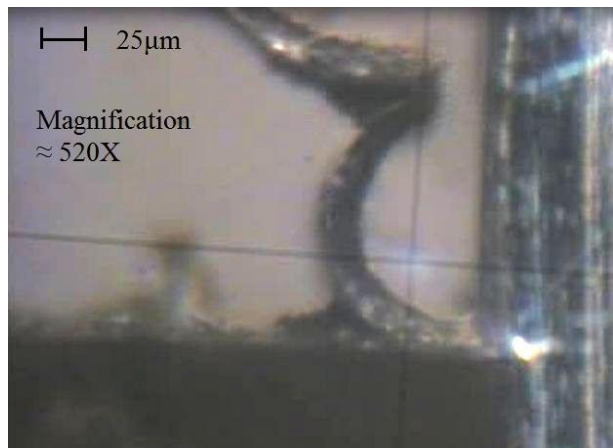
Diamond Tool 25 μm Depth of Cut Picture
